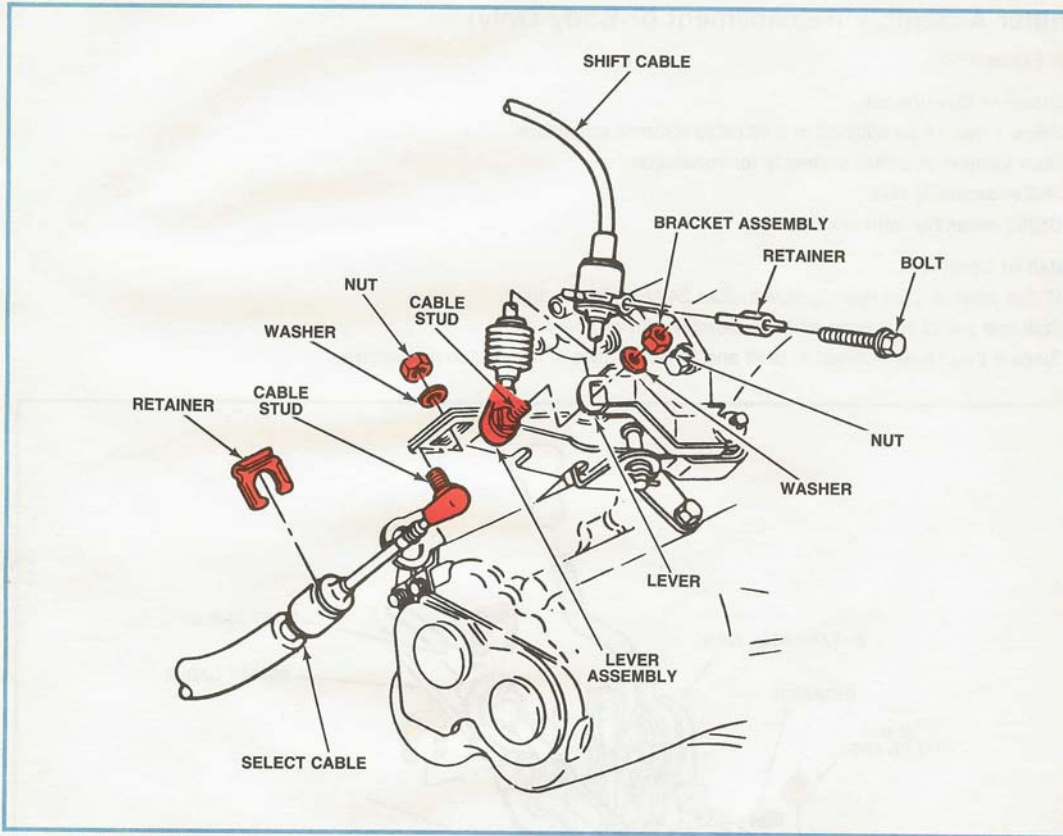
, Shift and Select Cable Routing and Attachment at Transaxle.
